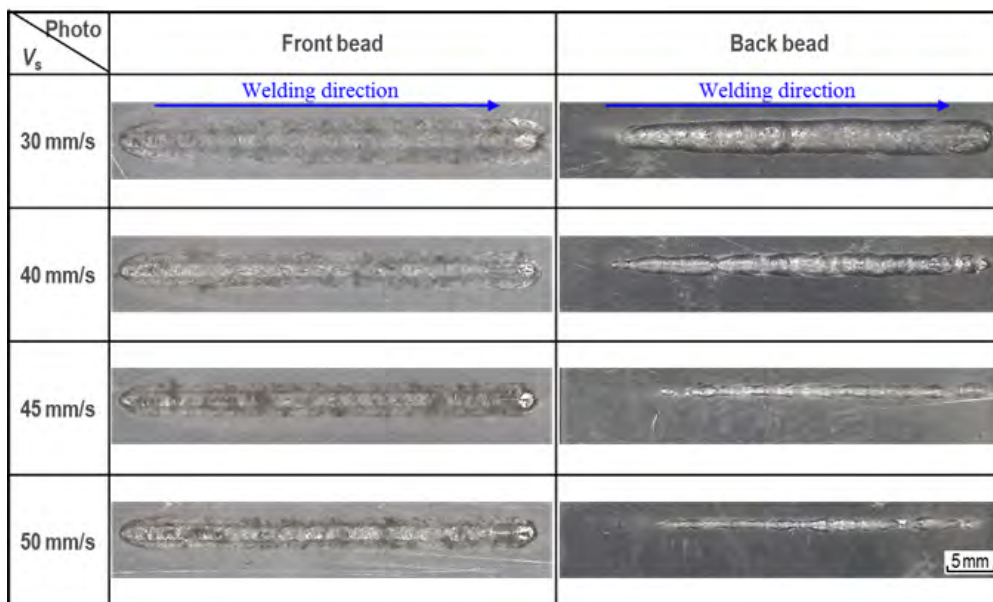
Weld bead appearance of AA6014-AA6451 laser lap dissimilar welding by change welding speed at 5 kW laser power
